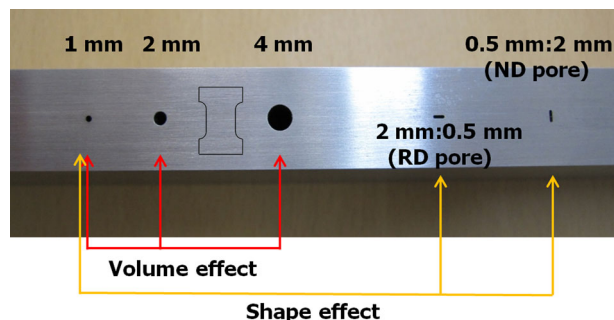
Precisely machined pores in rolling specimens and the sketch of tensile samples.
